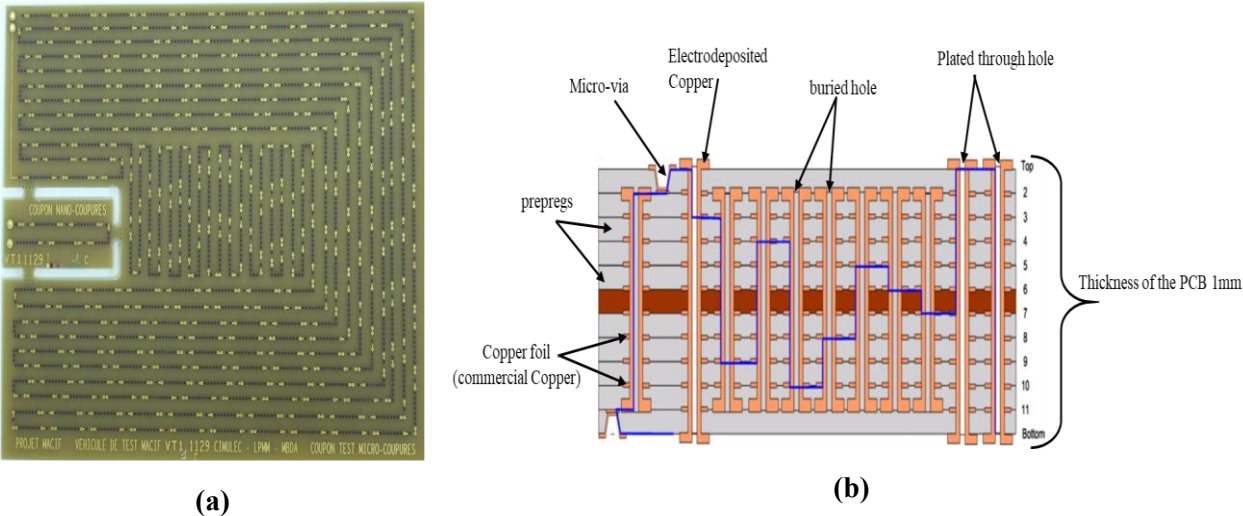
Printed circuit boards (PCB): (a) View of multilayer printed circuit boards and (b) Schematic cross section of the PCB [14].
